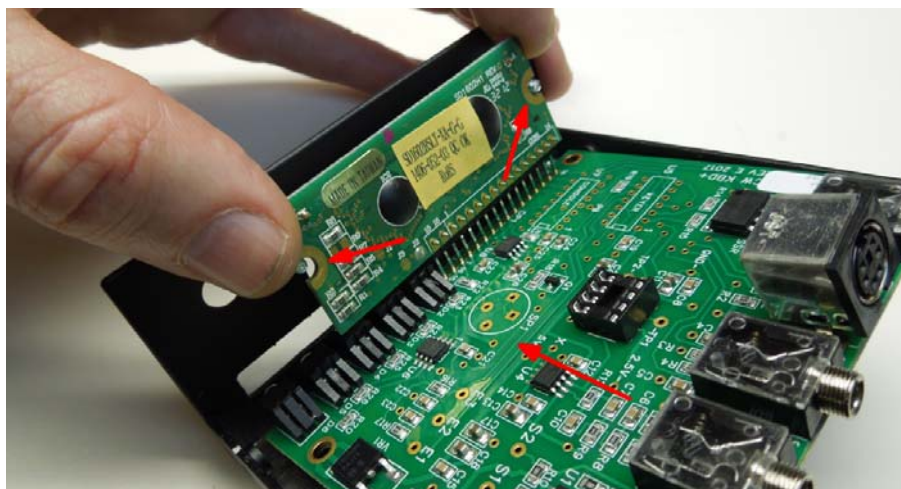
Slide subassembly into K44 enclosure base on threaded studs
